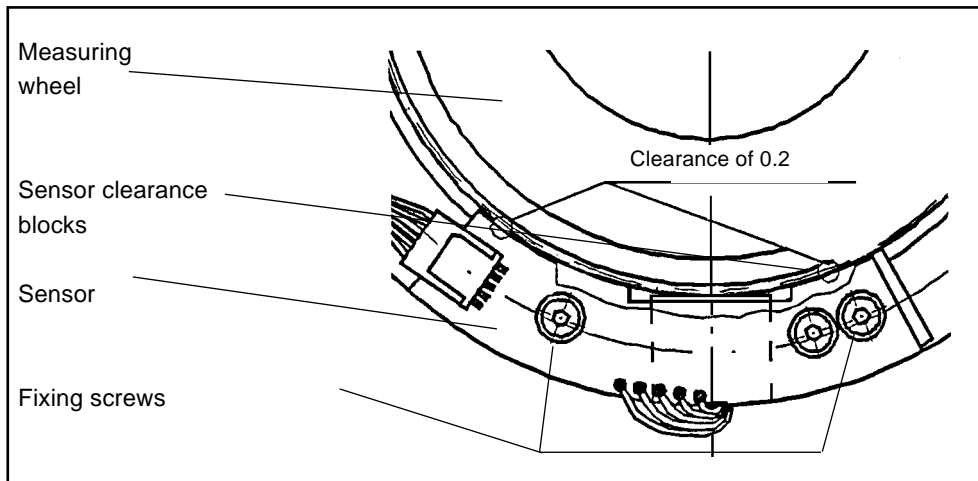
Adjusting the clearance between sensor and measuring wheel
